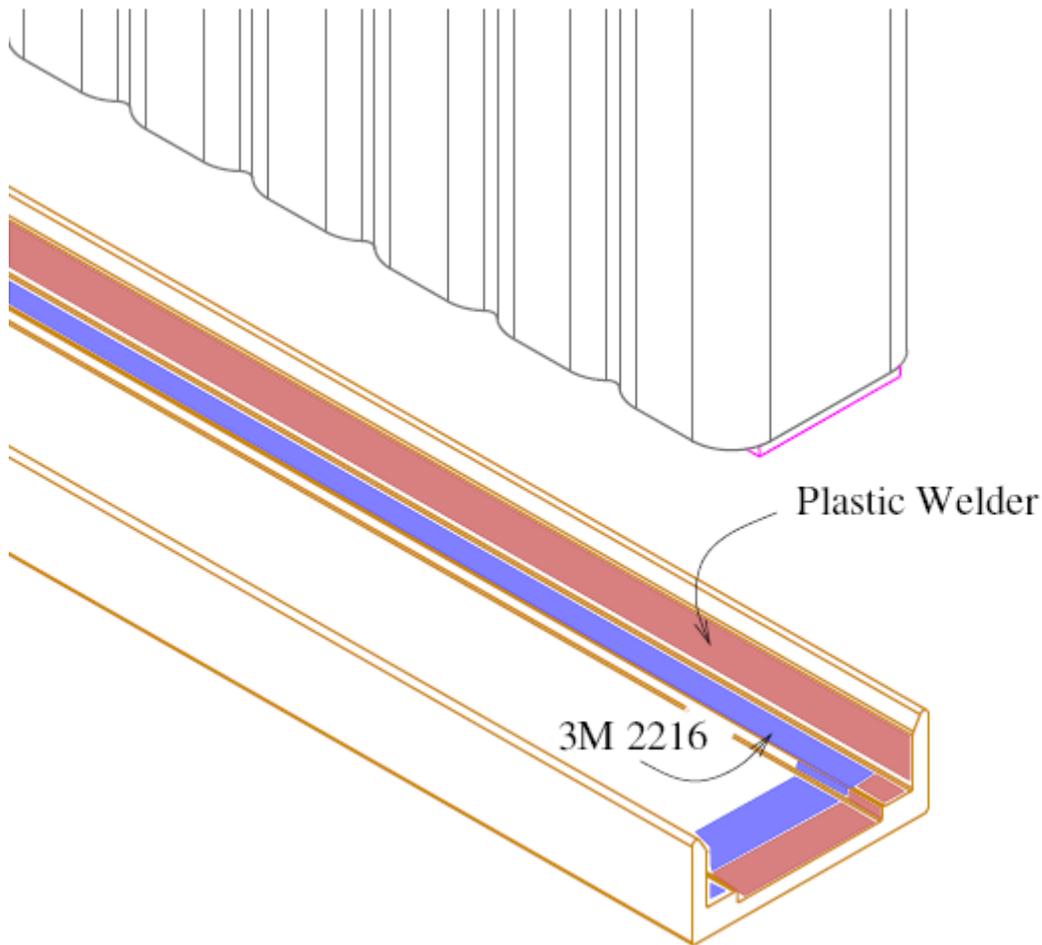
End plate assembly showing the position of the two different glue joints.
